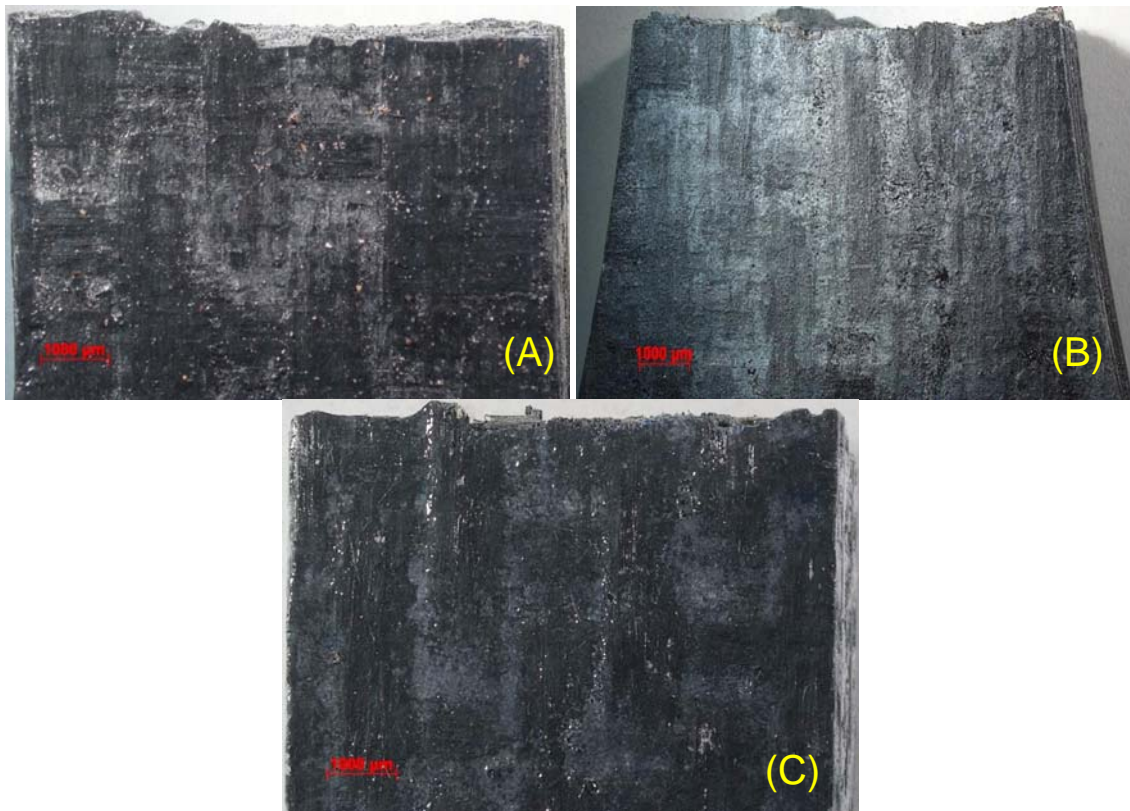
Fracture surfaces of composite C1 specimens obtained in fatigue testing in steam at 1300 °C, Maximum Fatigue Stress Level: 140 MPa (A), 120 MPa (B), and 100 MPa (C).
